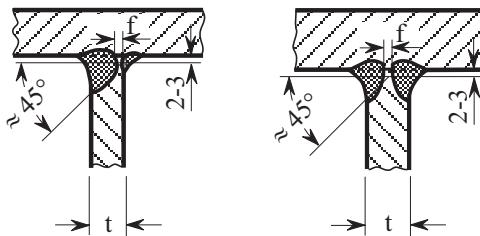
Single and double-bevel welds with defined incomplete root penetration
